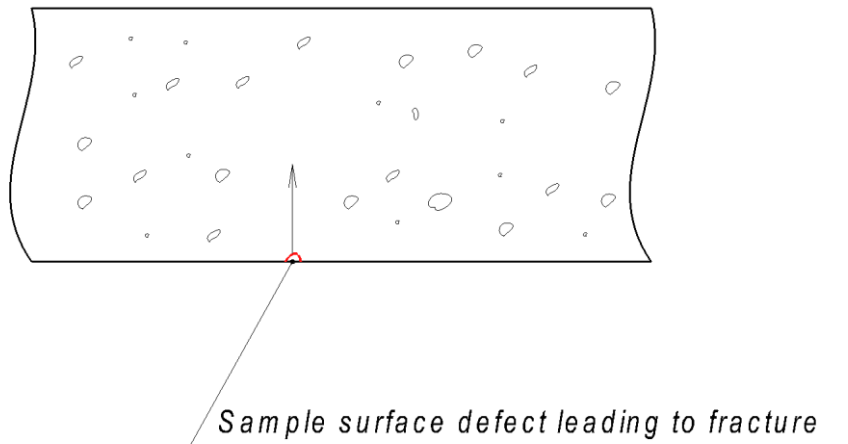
Schematic illustration of a sample surface defect leading to fracture.
